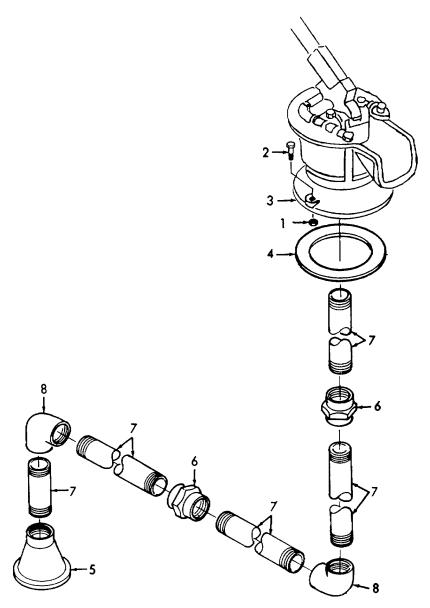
Bilge Pump and Piping, Removal/Installation.
